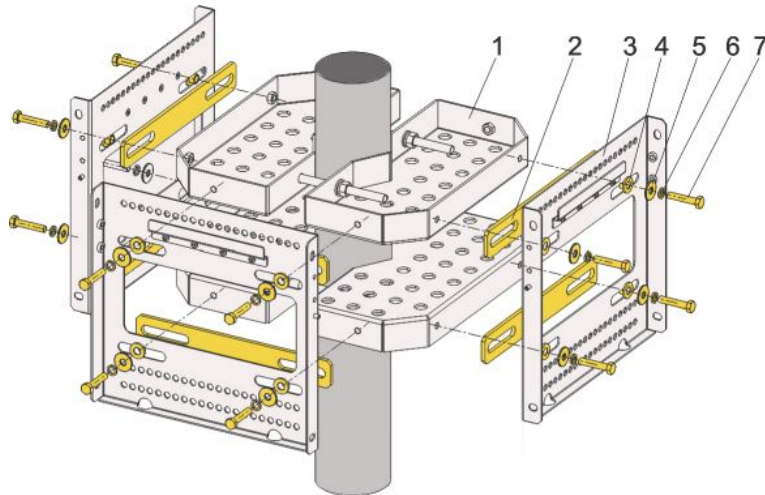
MOUNTING SUPPORTING PANEL (2)
